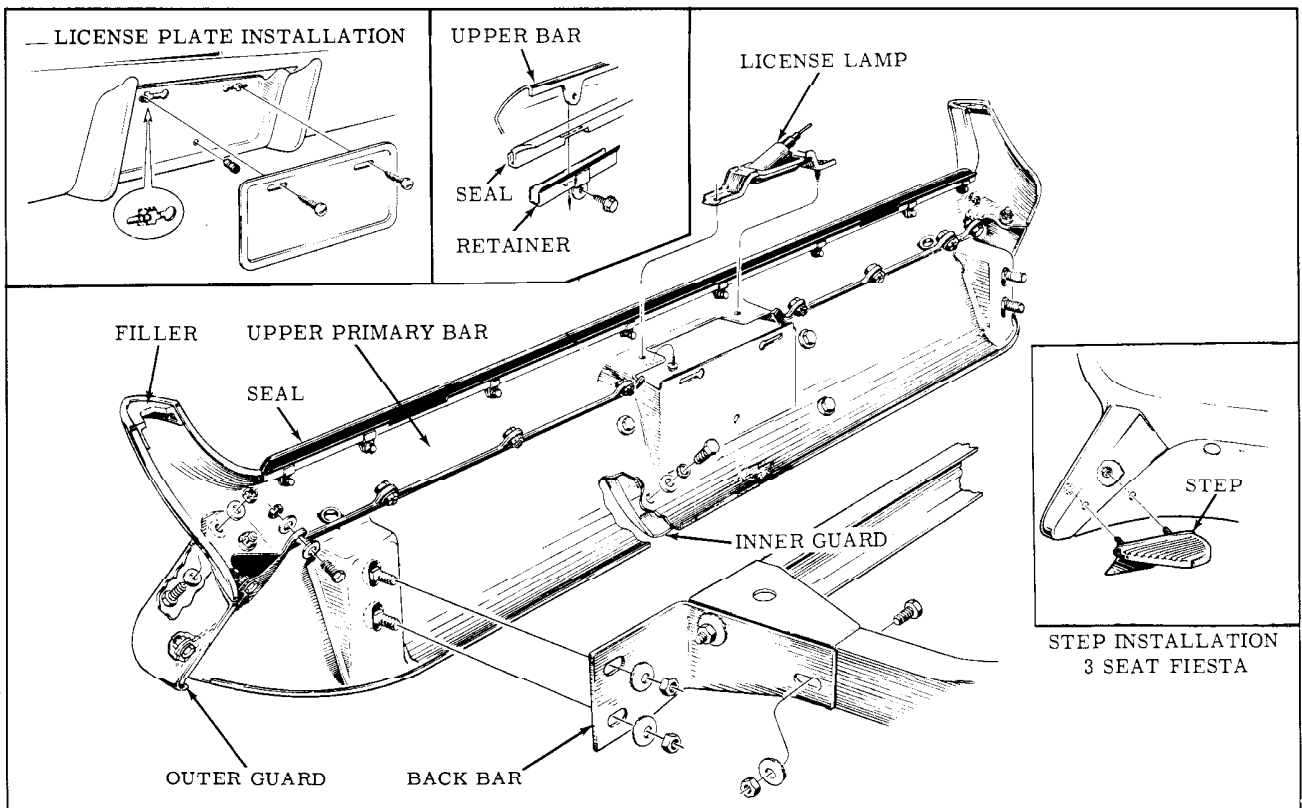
Rear Bumper Assembly (Fiestas)
